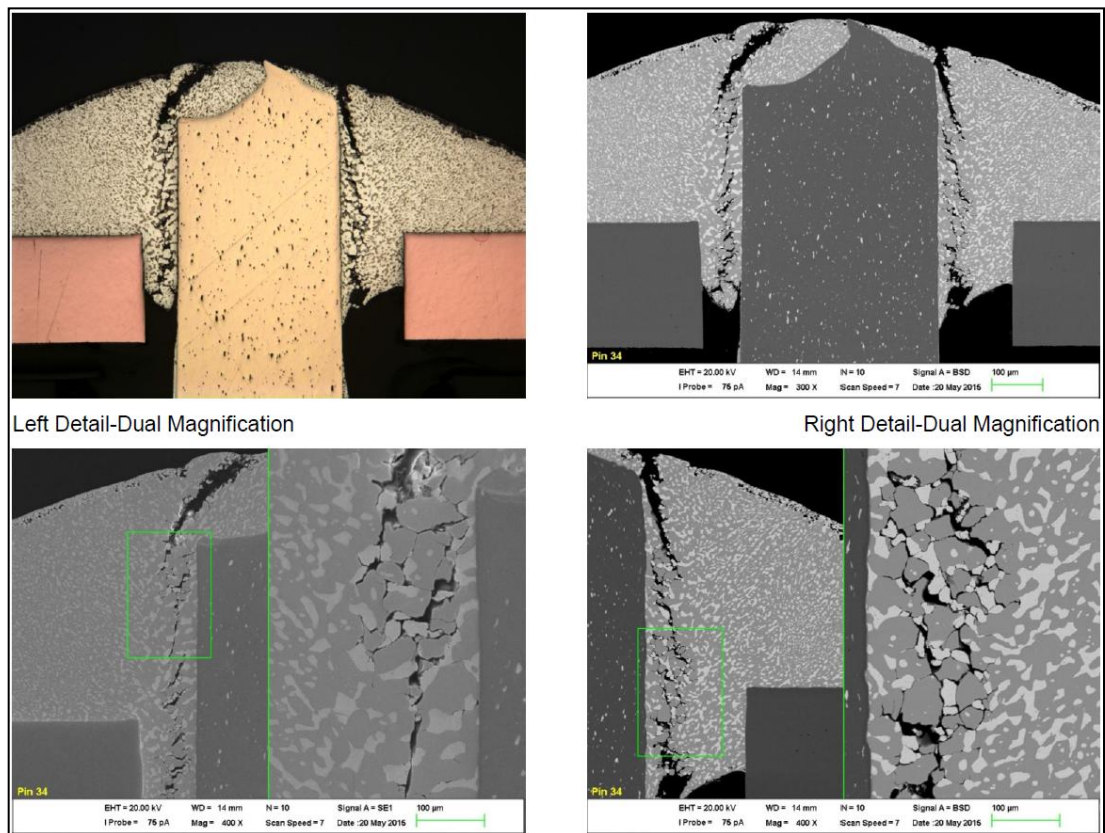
Cross sectioned pin to flex solder joints of Pins 34
